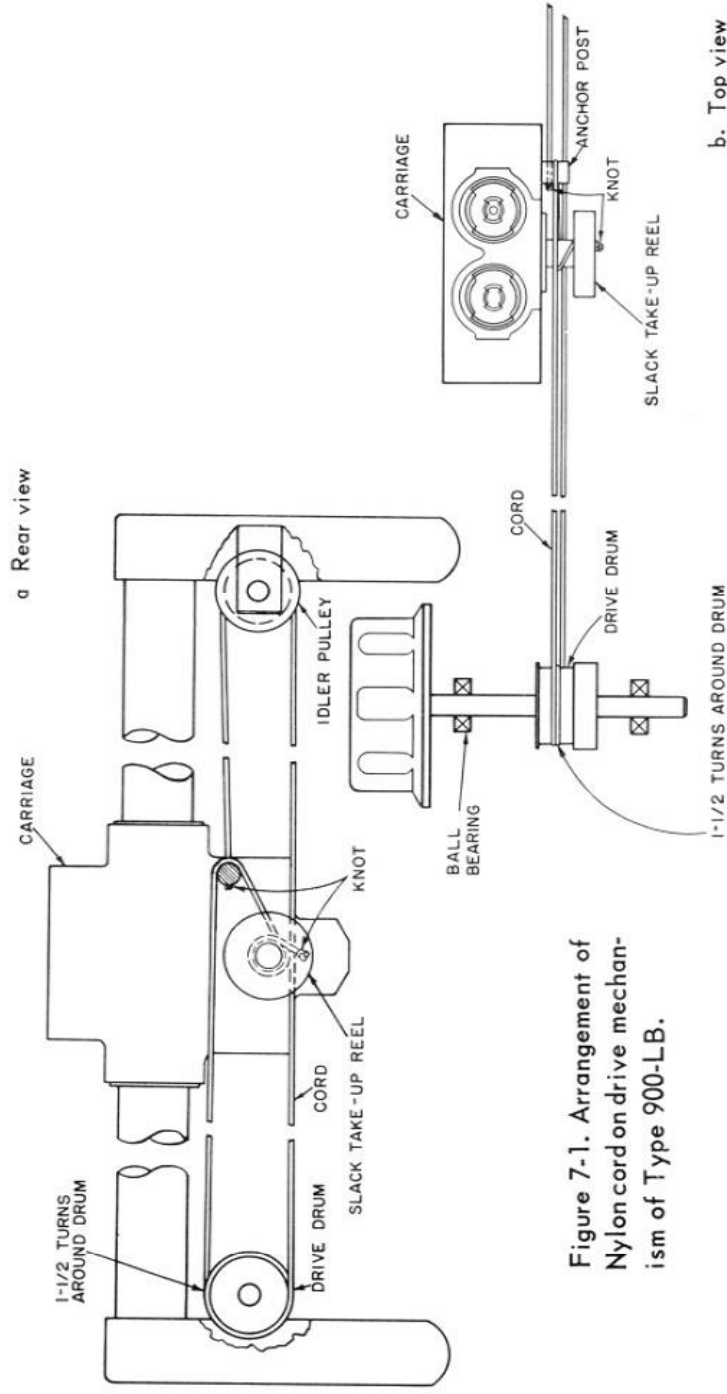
Arrangement of Nylon cord on drive mechanism of Type 900-LB.
